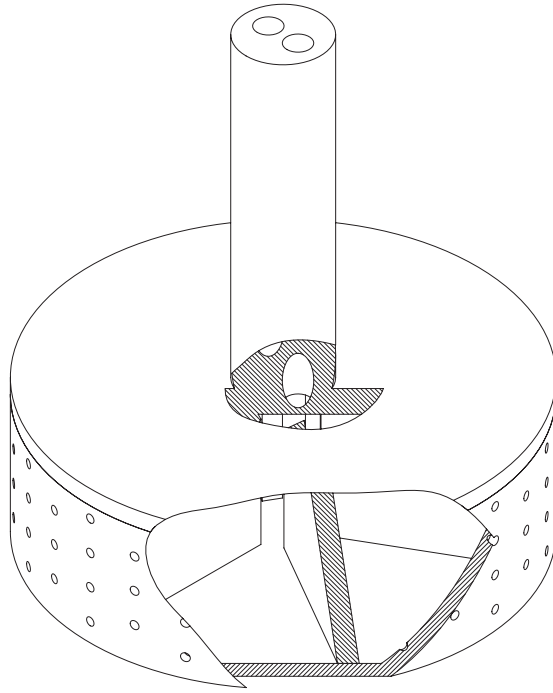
High shear mixer consisting of an impeller rotating inside a casing with small holes.
